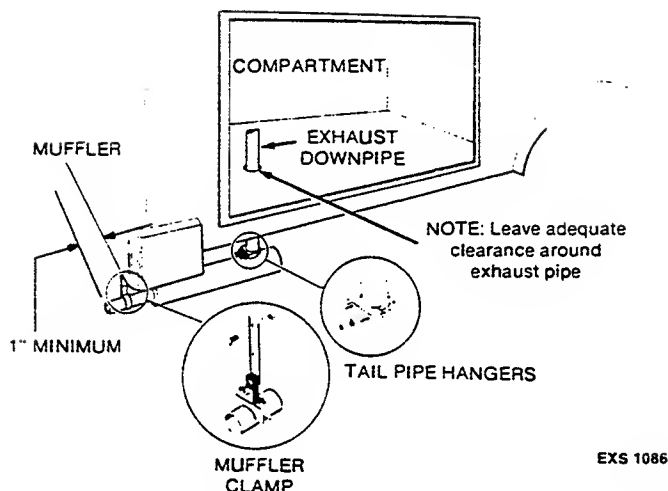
TYPICAL EXHAUST SYSTEM INSTALLATION
